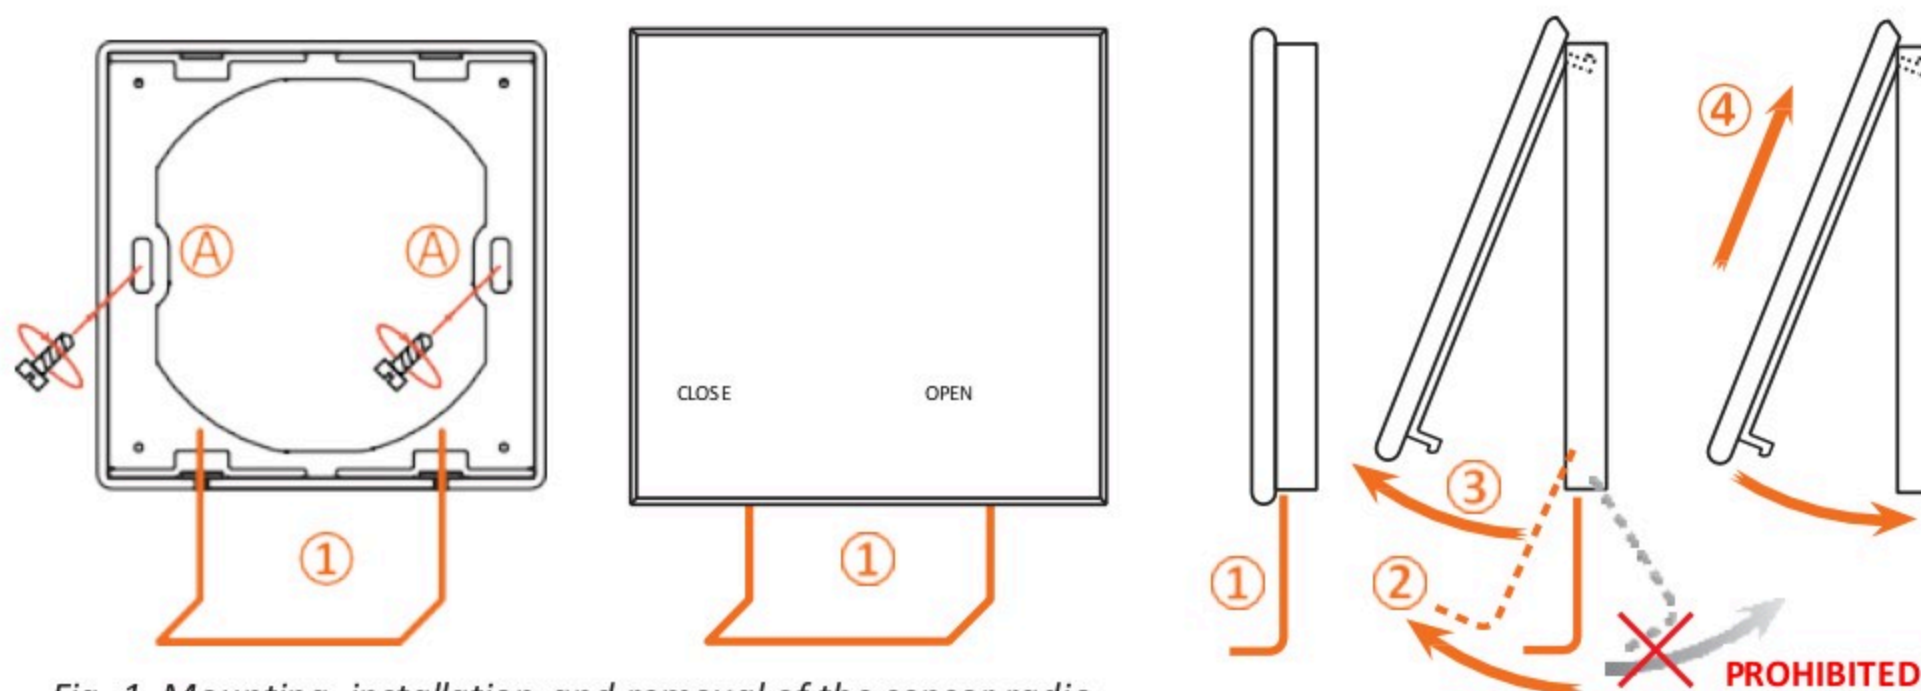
Mounting, installation and removal of the sensor radio remote control
